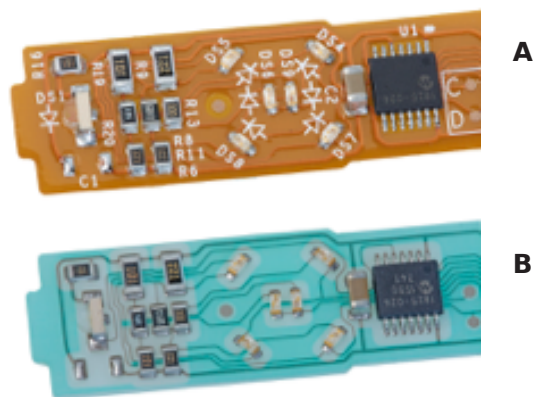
PCB product made with traditional technology (A) and with PE technology (B)
